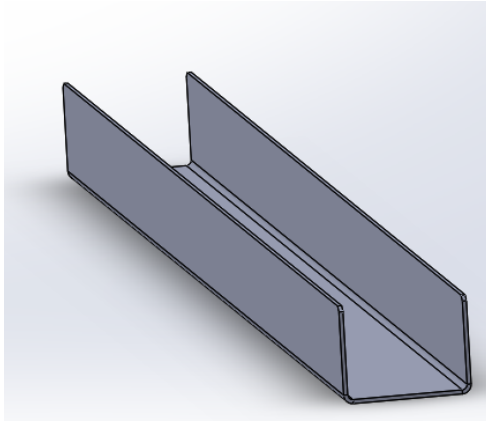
Idea C: Sheet metal with U-shaped cross section
